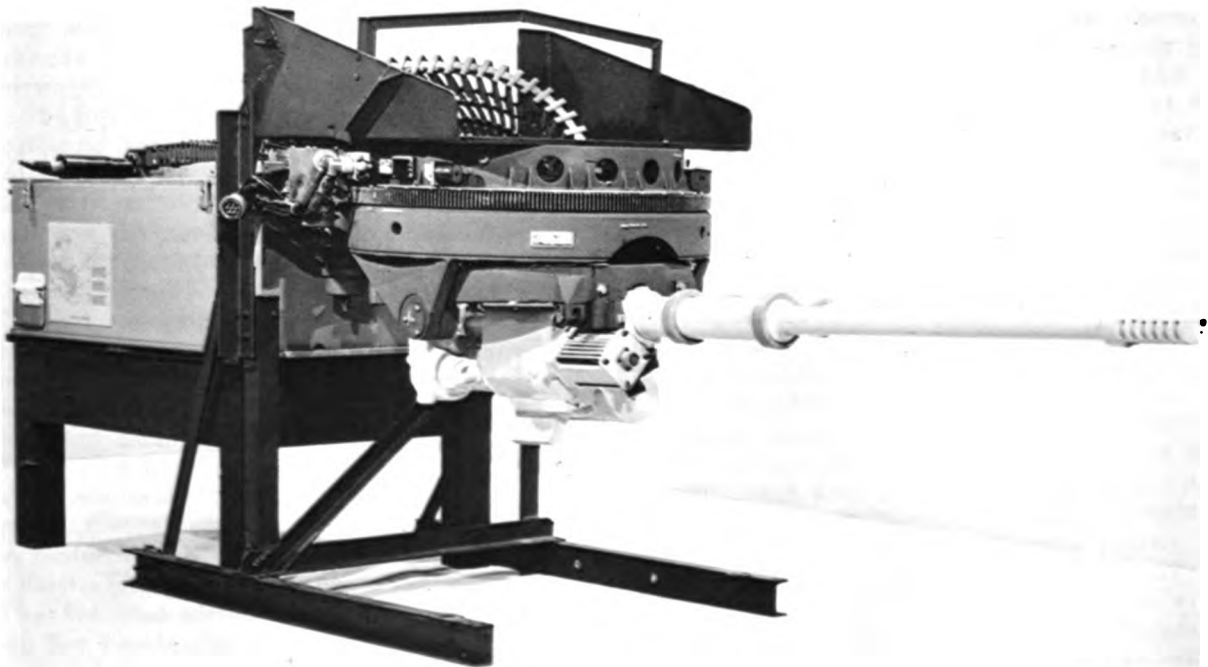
XM230E1, 30 mm chain gun with ammunition container mounted in universal turret
